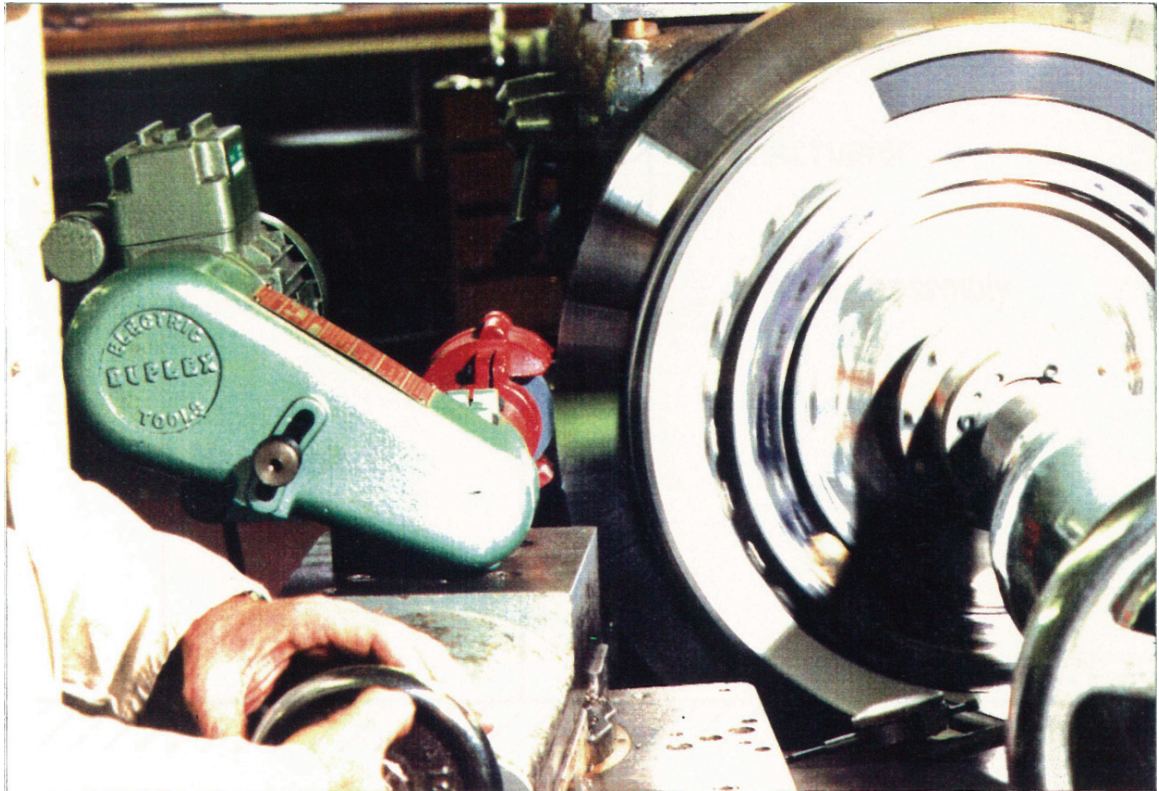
Turbine blades ground to length while mounted on turbine disc (which was mounted on dummy shaft fitted in a lathe); rotational speed 60 rpm with grinding machine mounted on lathe headstock
